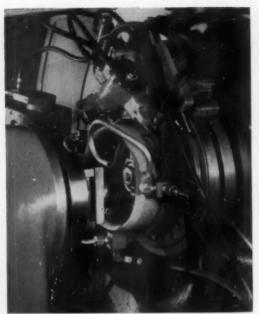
Curvie coupling grinder. The cup type wheel grinds curved slots in workpiece, which is indexed for grinding of each slot.
